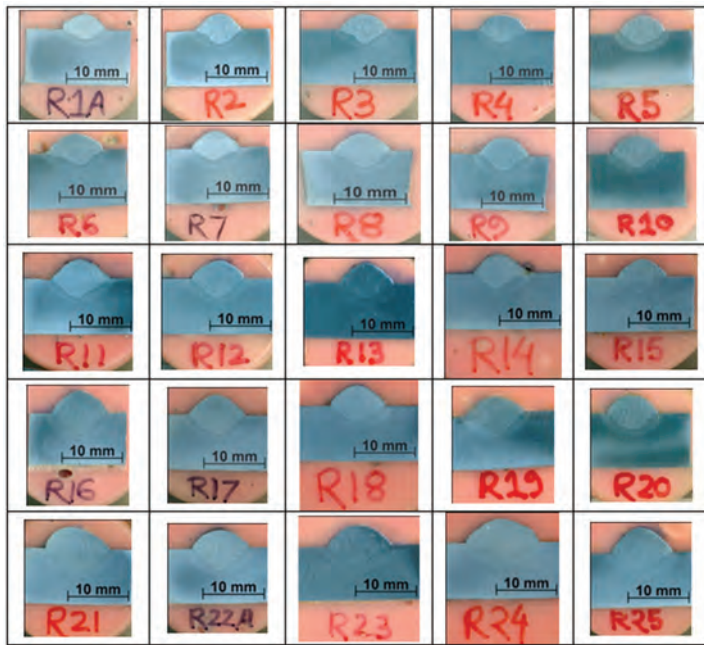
Images of sections of weld bead geometry under different welding conditions.
